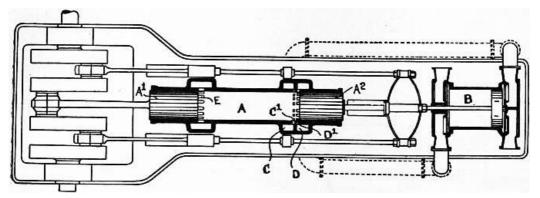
Arrangement of Oechelhäuser Gas Engine.
